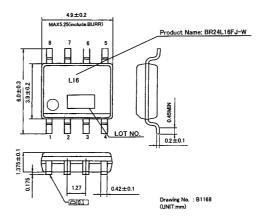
(b) PHYSICAL DIMENSION SOP-J8(BR24L16FJ-W)
